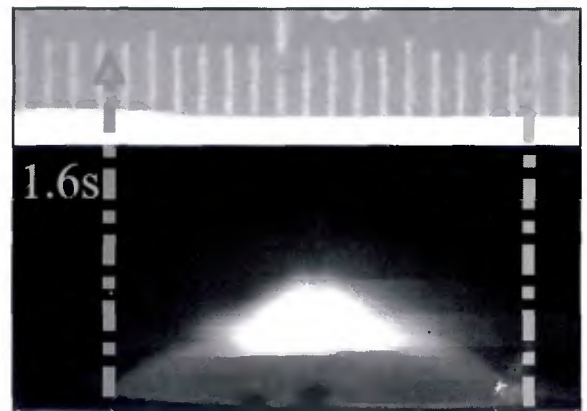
The sample of captured images showing the measurement of weld pool radius at 1.6 s weld time.
